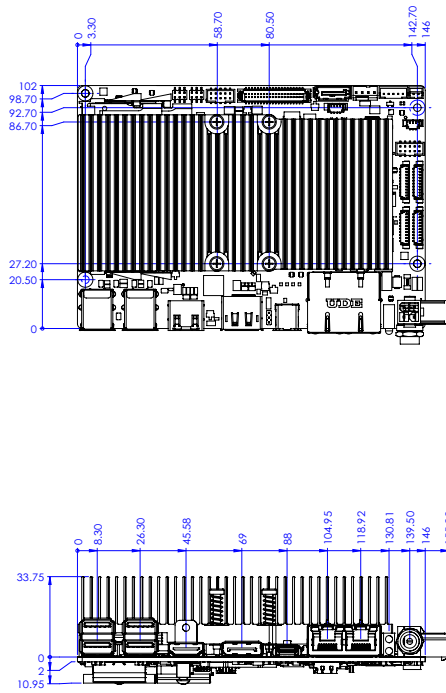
MIO-5375 Mechanical Drawing (with Heatsink)
